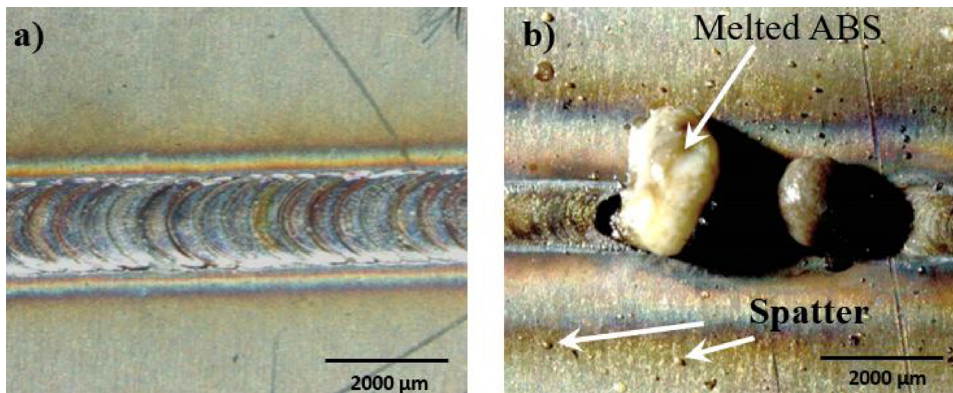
Weld bead appearance of steel surface at different focal lengths of a) 5 mm, b) 2 mm.
